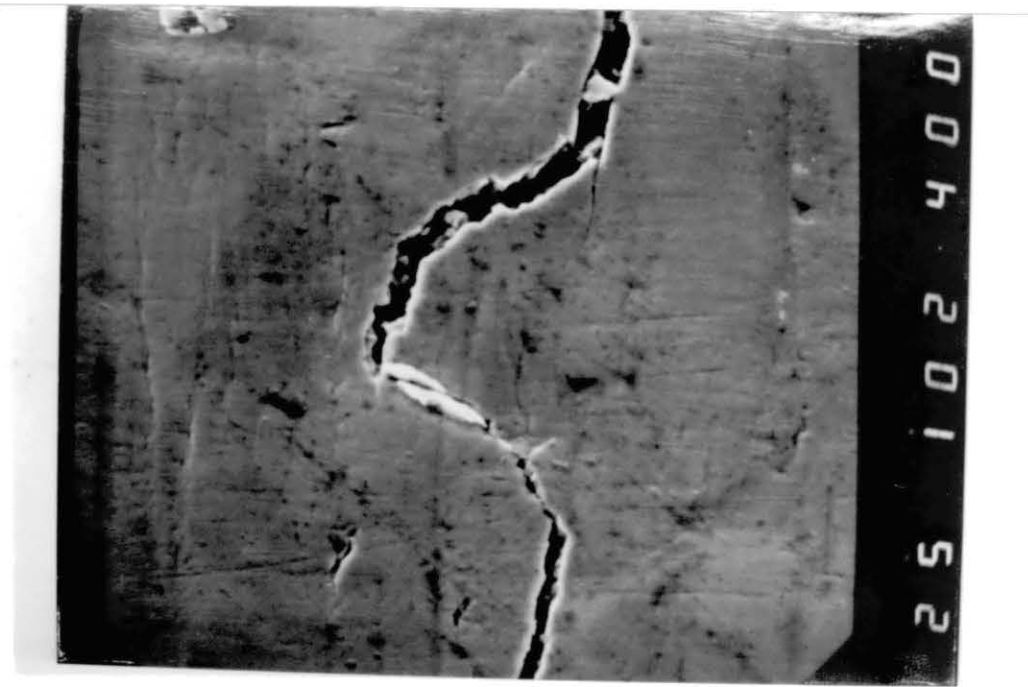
General View of the Fractured Surface. Center of the Right Hand Side is the Fatigue Initiation Zone (20 x)
